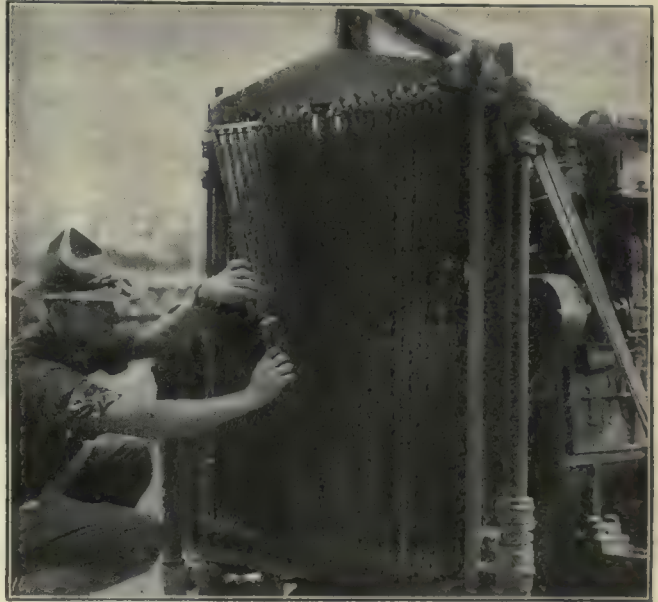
REMOVING DAMAGED RADIATOR SECTION
